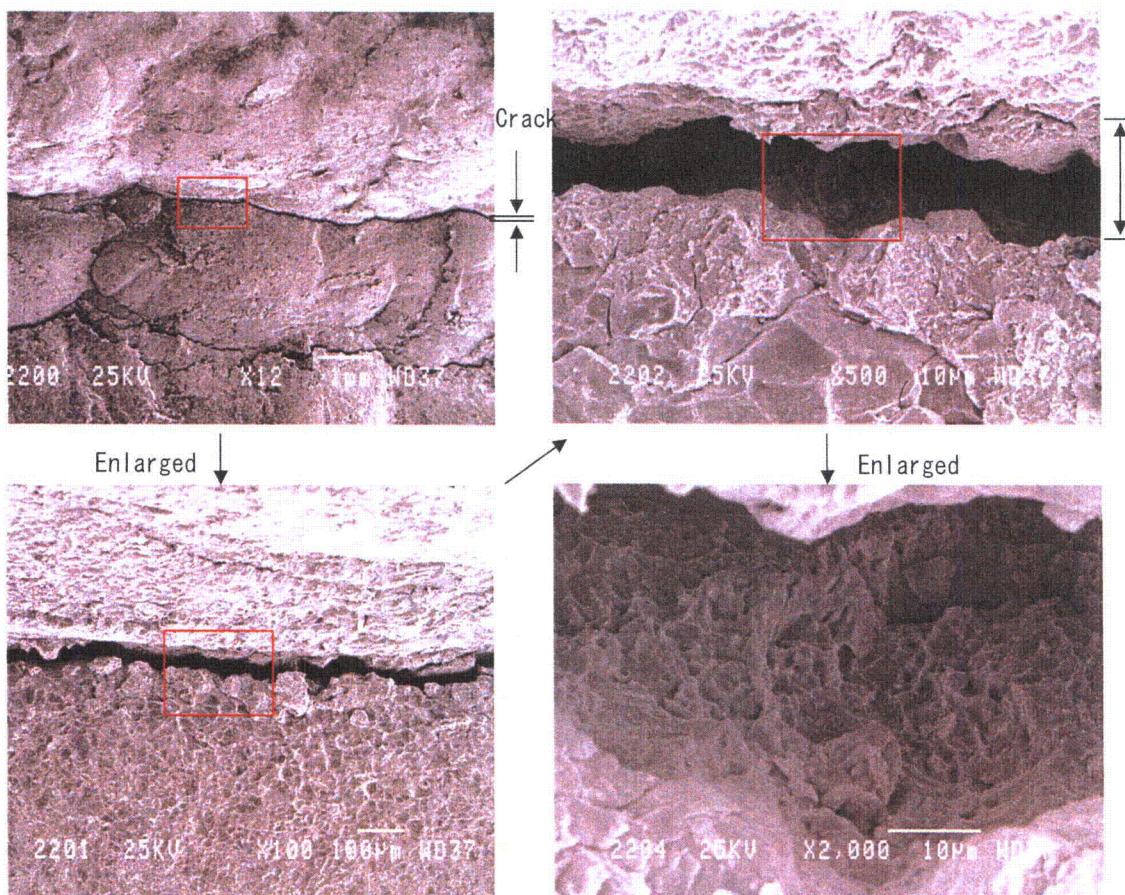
(2) SEM observation of fracture surface of sample D (Stainless steel clad by SMAW)
